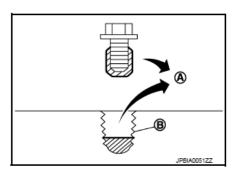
Removing Liquid Gasket From Bolt Hole And Thread Courtesy of NISSAN MOTOR CO., U.S.A.
